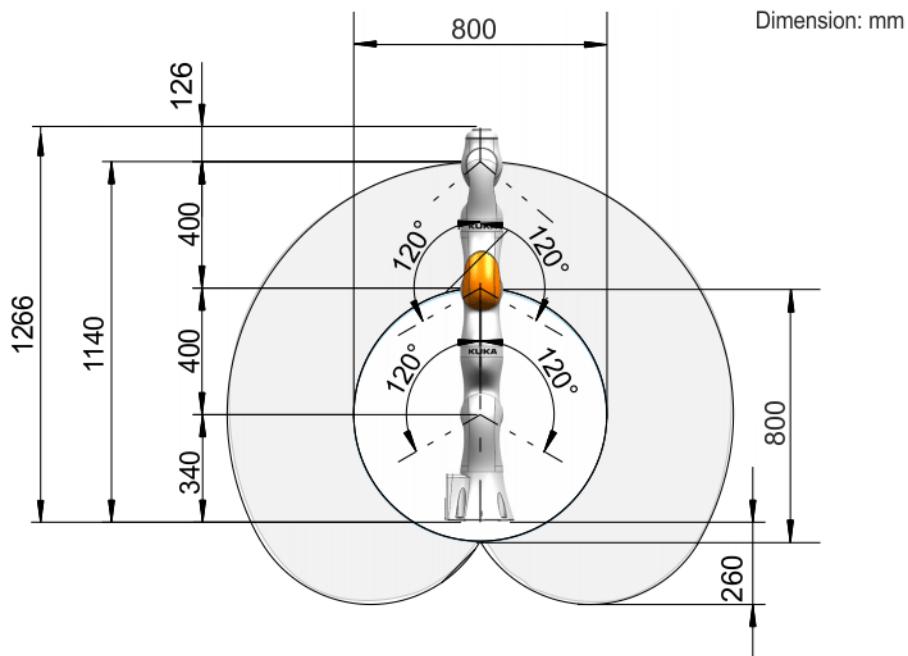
Working envelope, LBR iiwa 7 R800, side view
